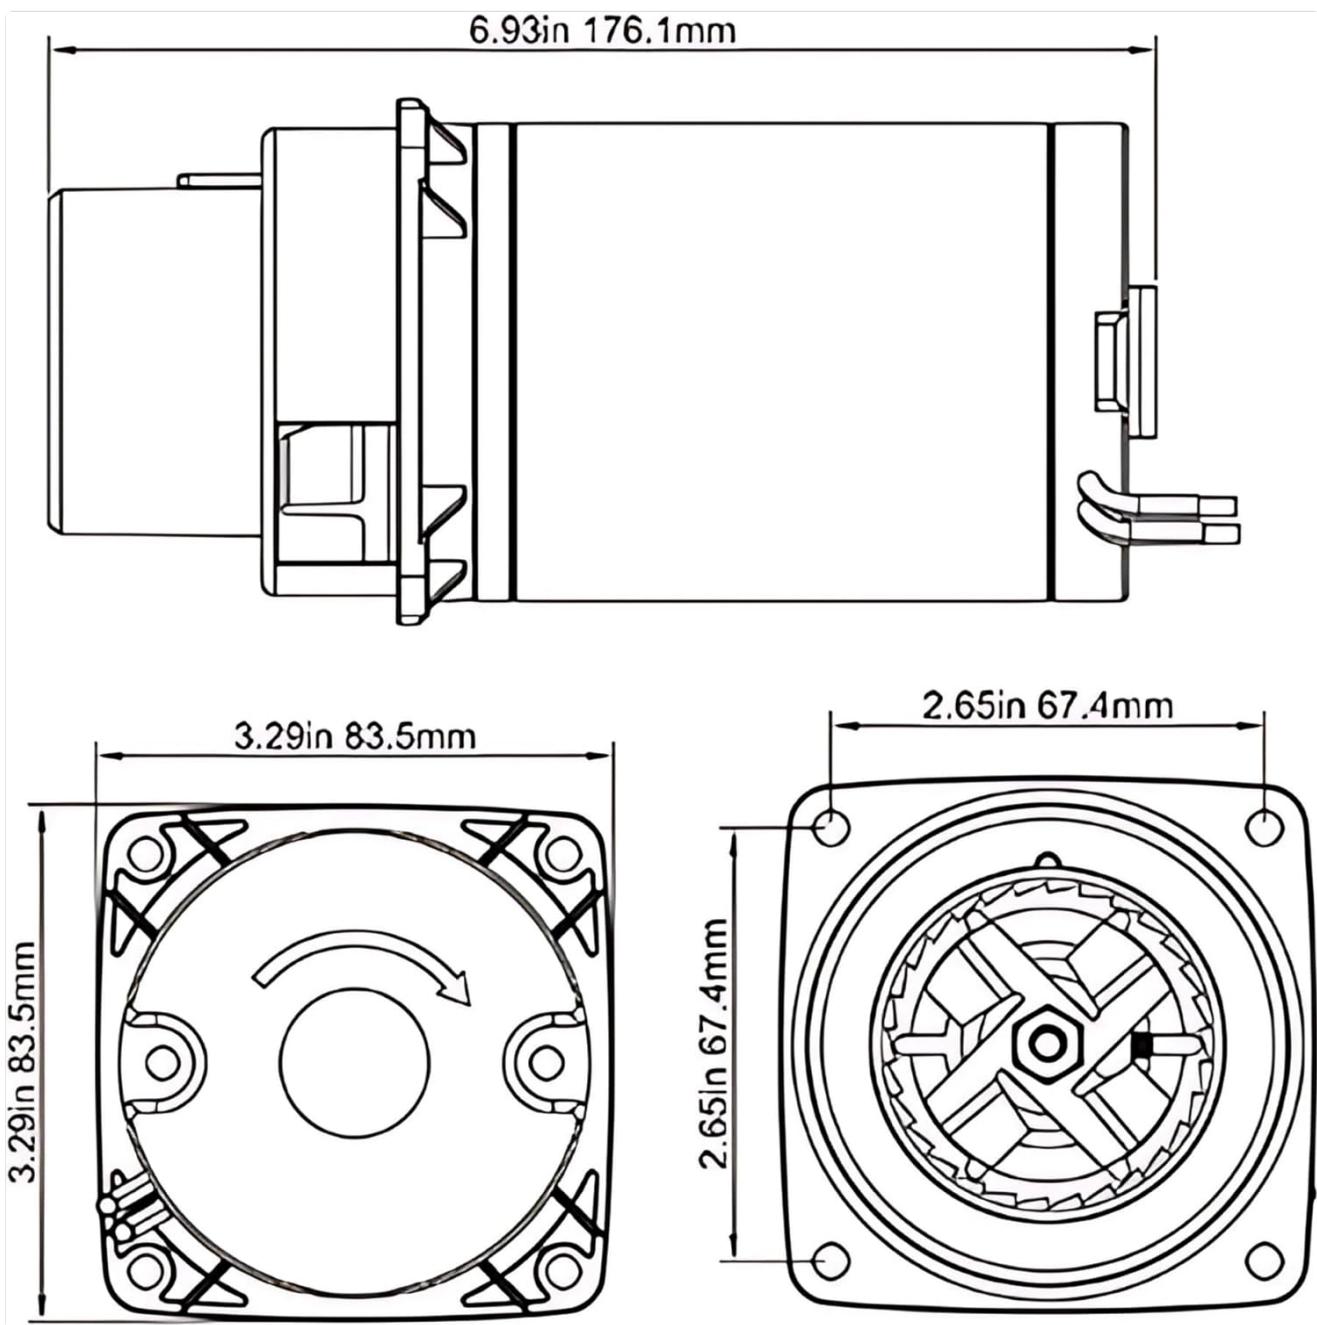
Dimensional Drawing of the SFMTP1-04 Pump.
